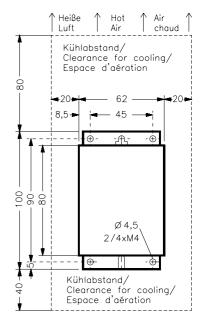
Outline drawing and mounting A 0.43RE220
